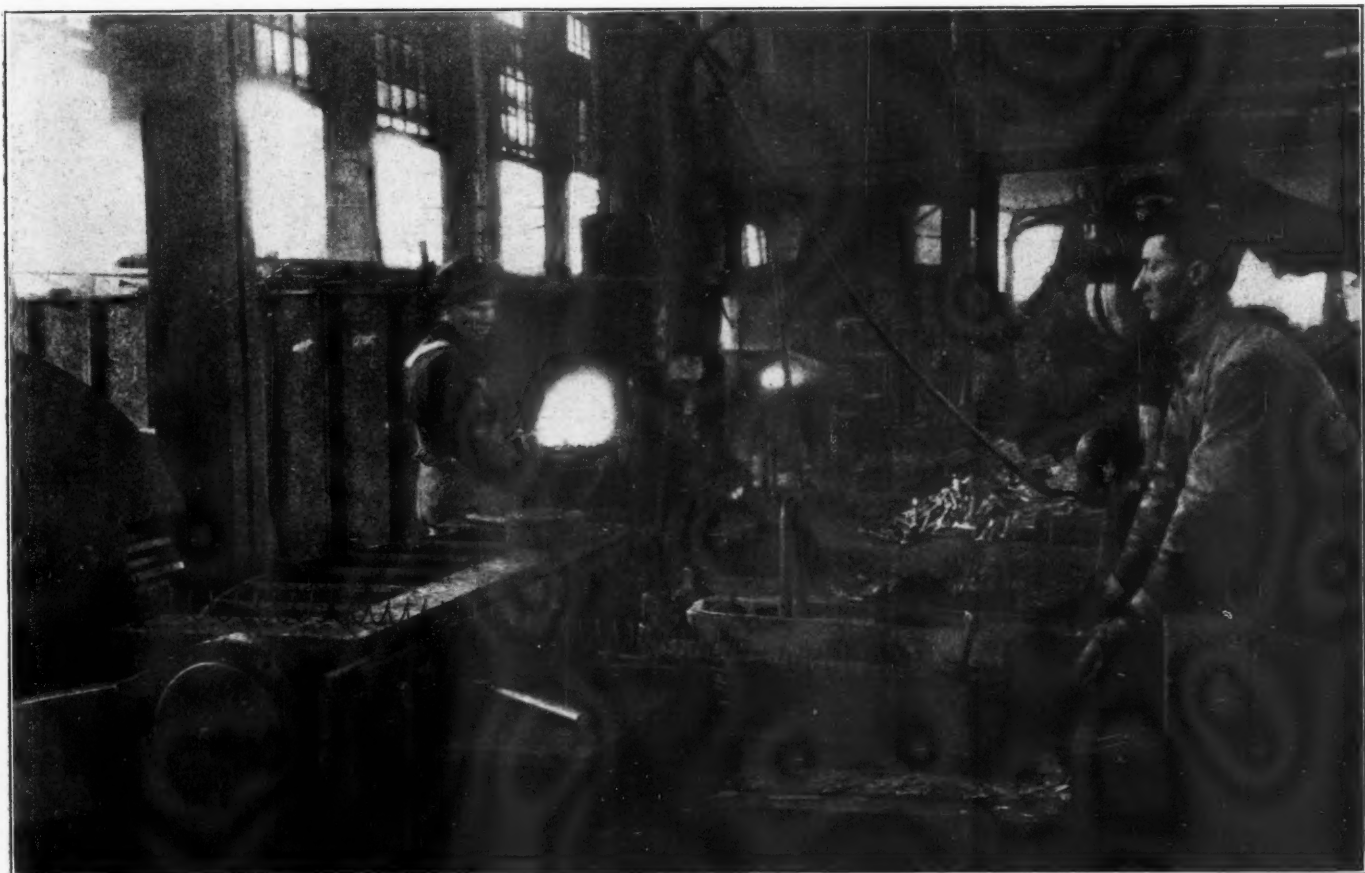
Bending Drawbar Yokes and Rivetting on End Plates in Bulldozer.
